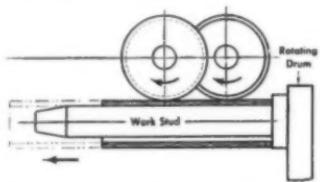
The cork cots are carried by mandrels mounted on a drum that rotates eccentrically around the regulating wheel. The cots touch the regulating wheel before grinding contact is made.
